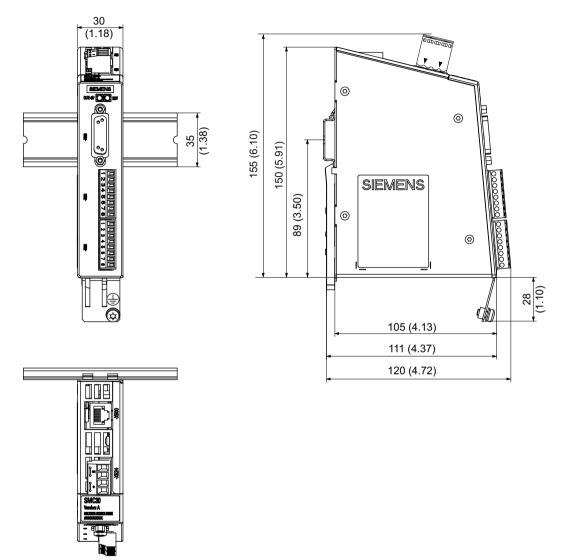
Dimension drawing of the Sensor Module Cabinet SMC30, all data in mm and (inches)
